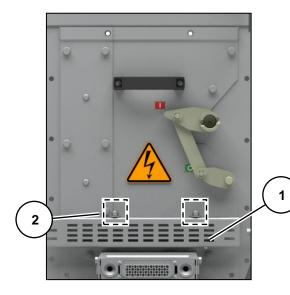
Contactor panels with panel width 435 mm only: 2 bolted joints on the heater
